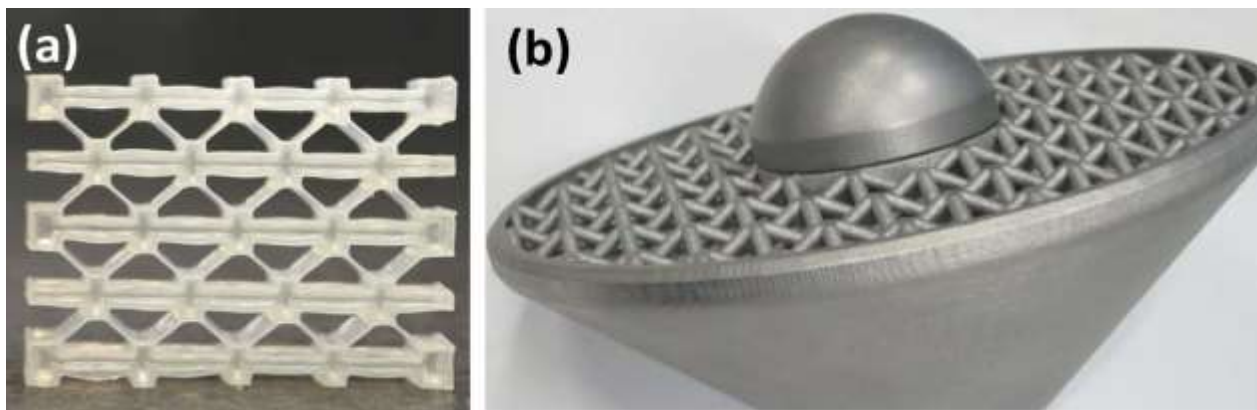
(a) an additively created protective framework for Mars specimens re-entering Earth from Mars [292], and (b) a 3D printed various-stable architectural structure [279].
